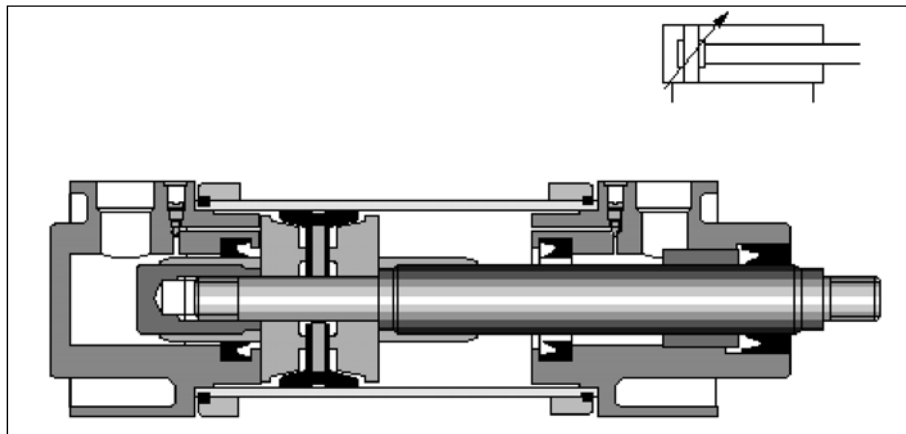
Double Acting Cylinder with End Position Cushioning
